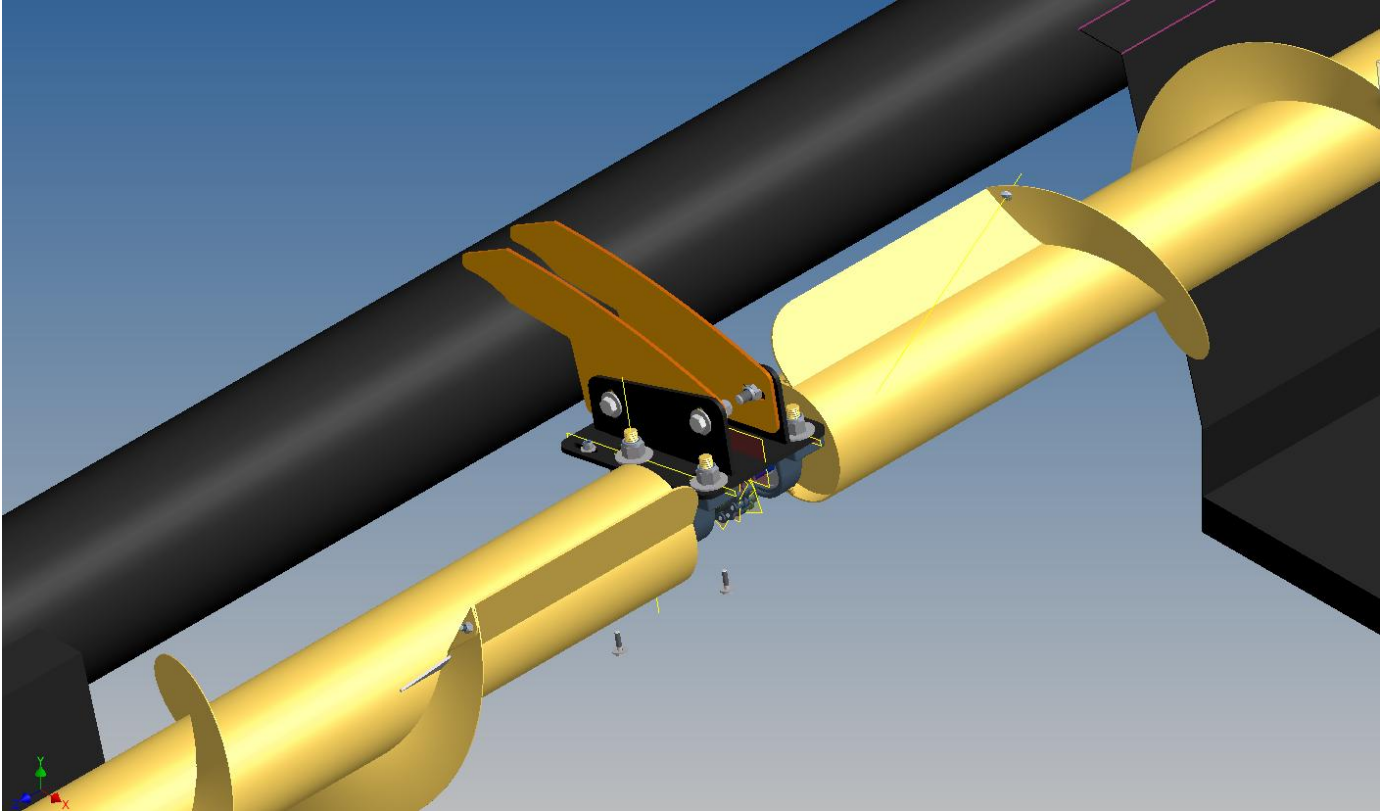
36 FOOT CENTER BEARING MOUNT BOLTED TO HEADER WITH GUARD REMOVED
